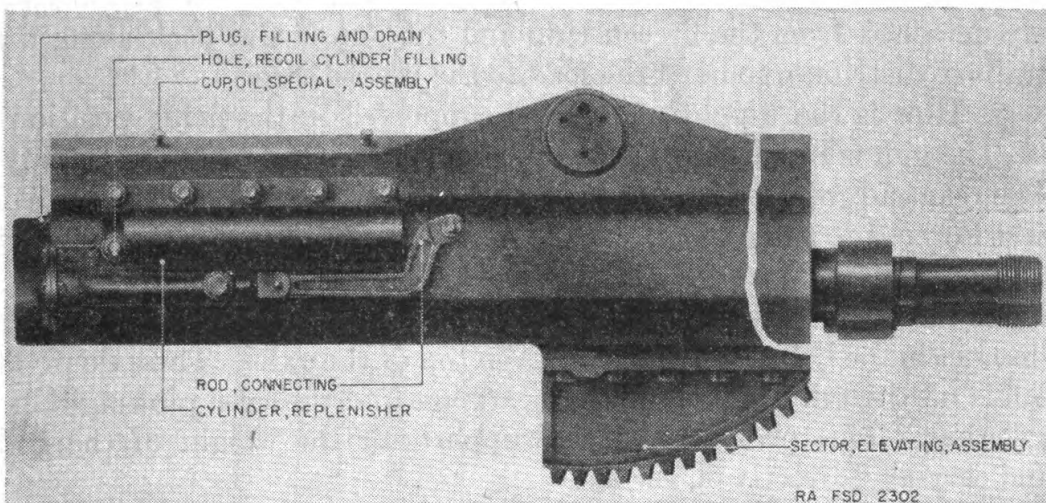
Recoil mechanism, 155-mm gun M1918—side view.
